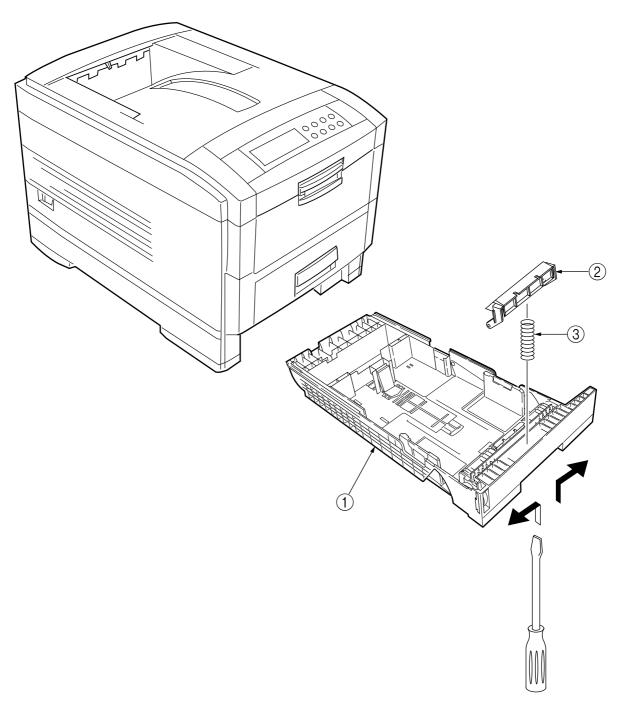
Retard Pad Assy/ Retard Pad Assy Spring
